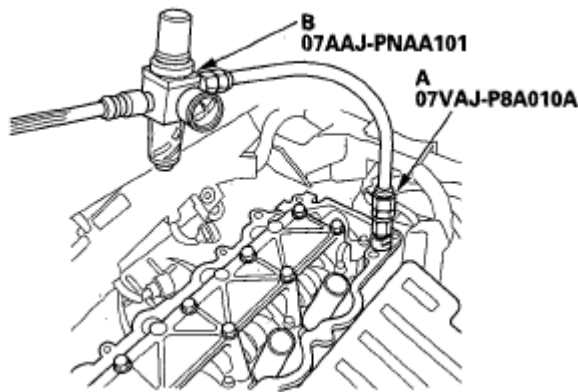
Locating VTEC Air Adapter And Air Pressure Regulator
